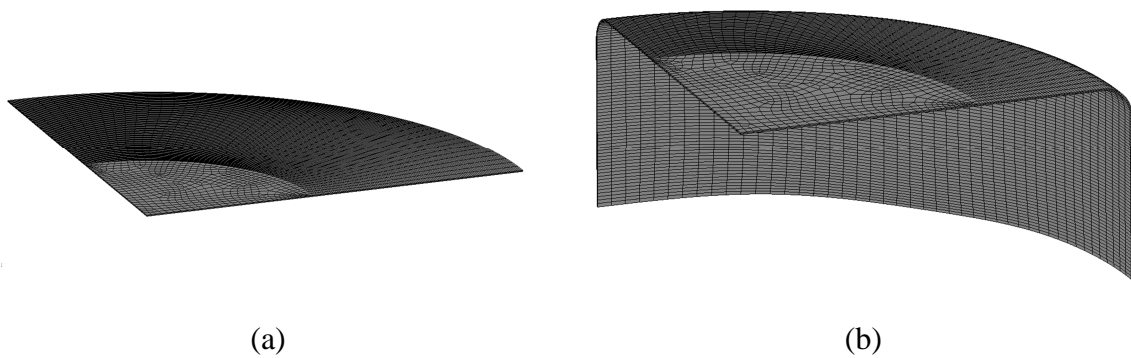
Drawing operation – Aluminum cup: (a) Before drawing (b) After drawing.
